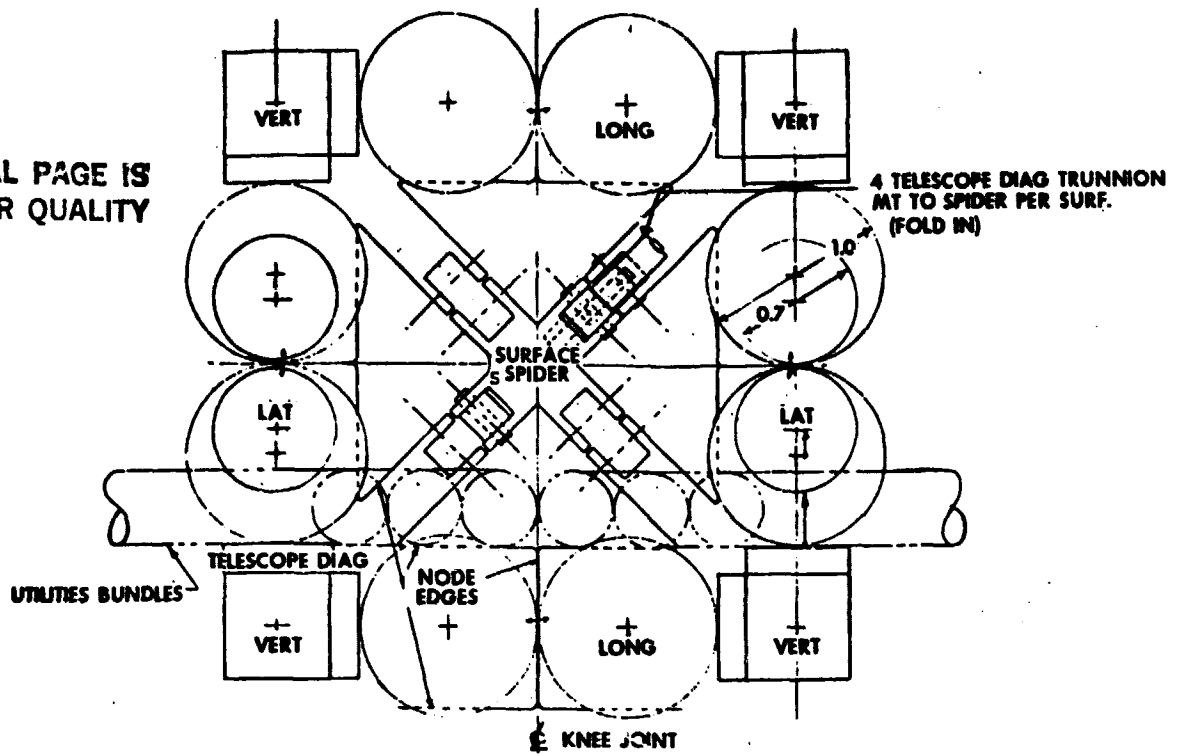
BOX TRUSS EXTERNAL UTILITIES ROUTING
